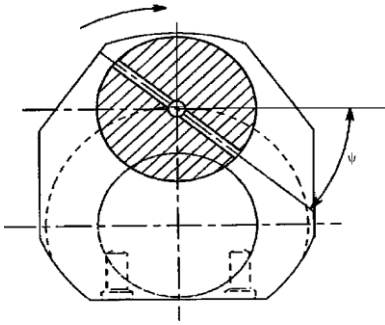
Sectional view of the crank pin in way of oil bore
